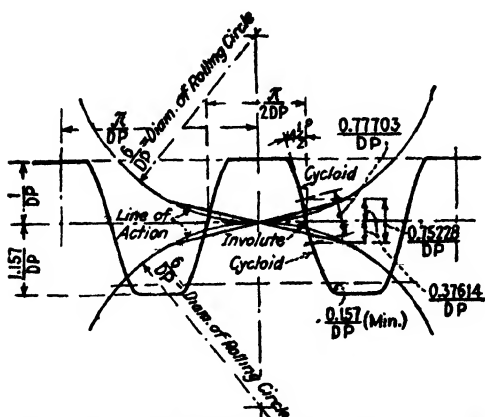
Basic rack for 14½-deg. full-depth tooth—composite system.
